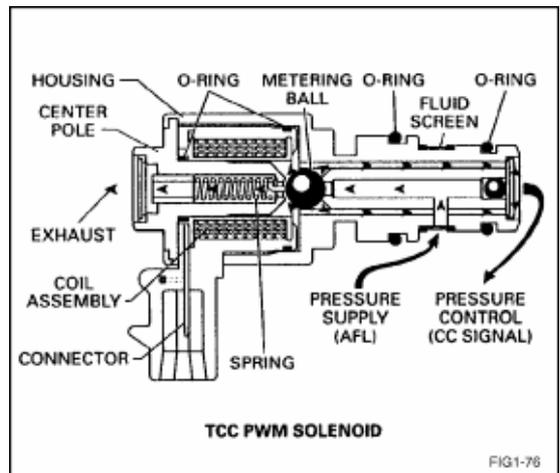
C2-1-79 Torque Converter Clutch (TCC) "PWM" Solenoid Cutaway View
